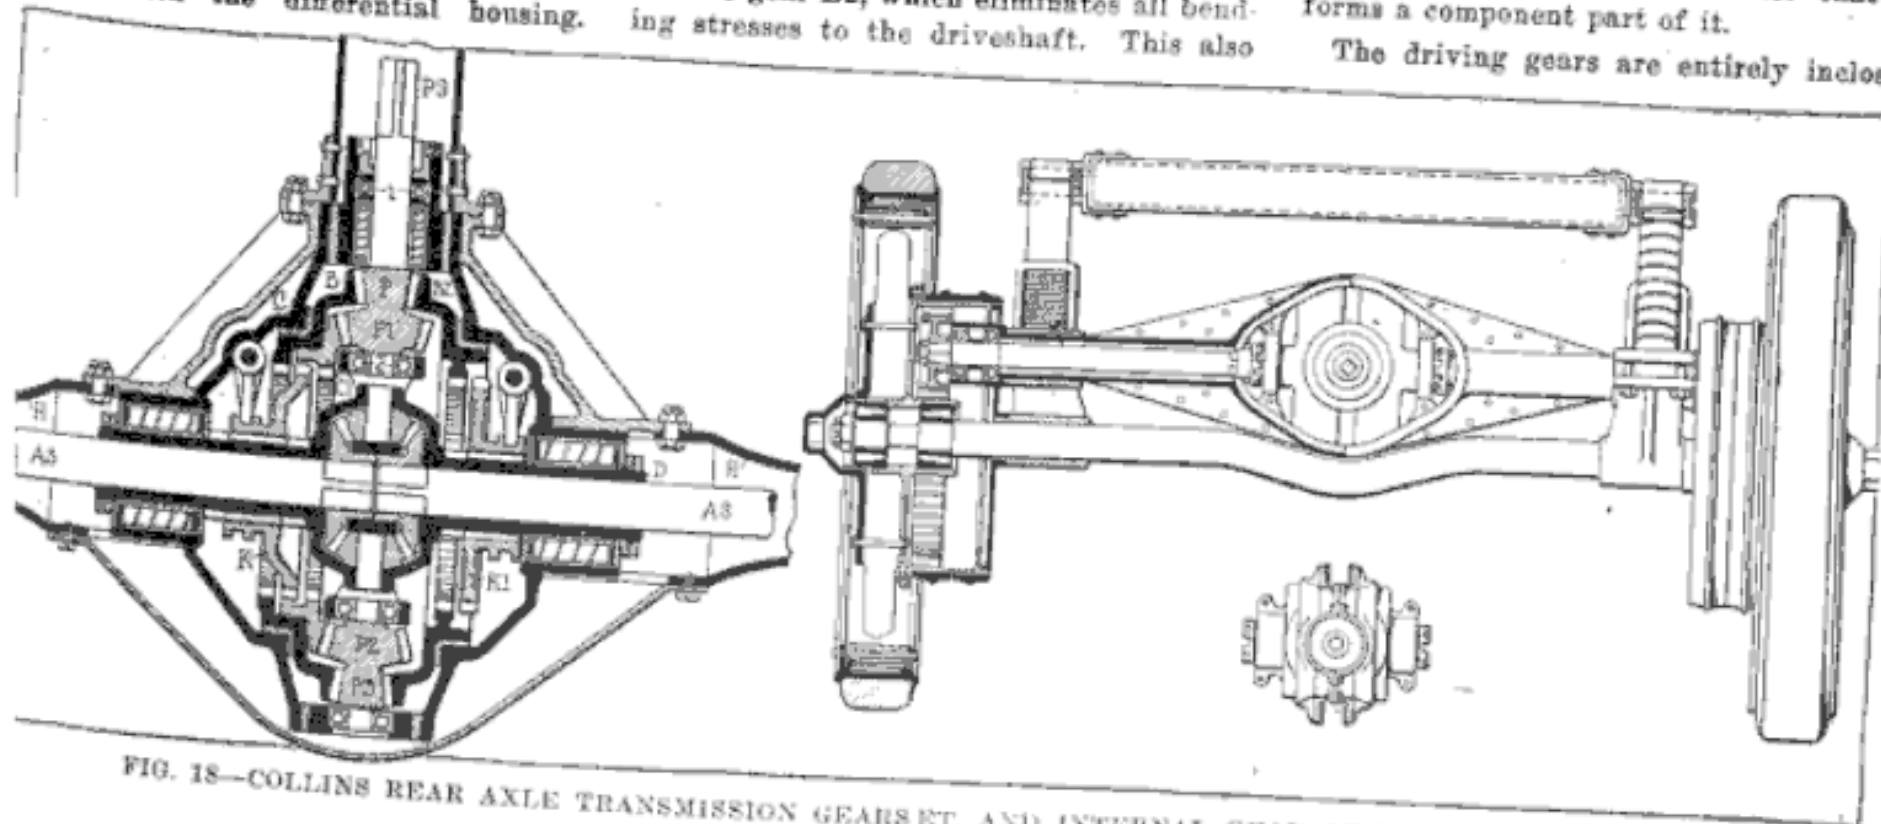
COLLINS REAR AXLE TRANSMISSION GEARSET, AND INTERNAL GEAR DRIVE CONSTRUCTION
